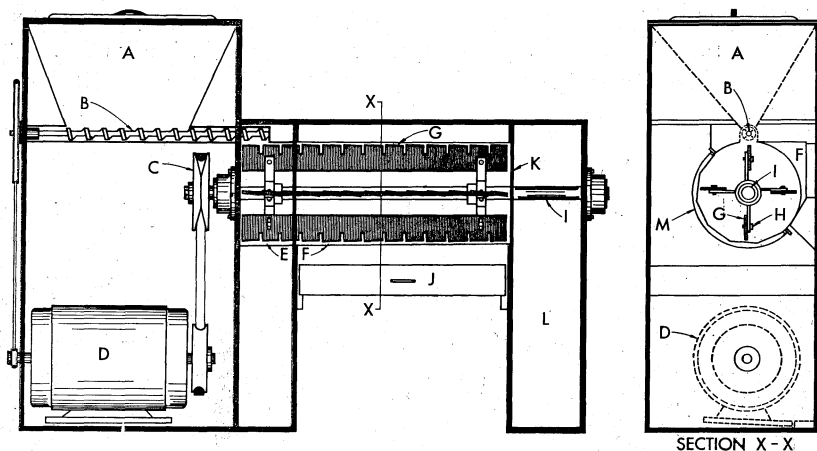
Drawings of front and end views with plates removed to show interior detail.
